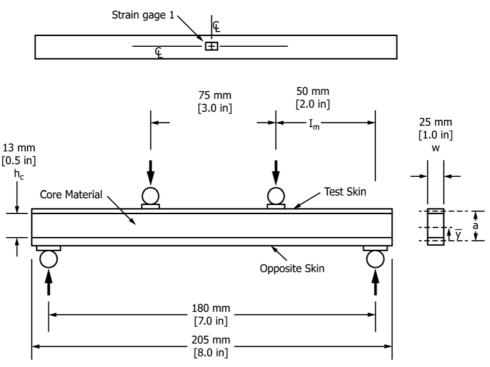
Transverse (90°) Compression Sandwich Beam Test Specimen
